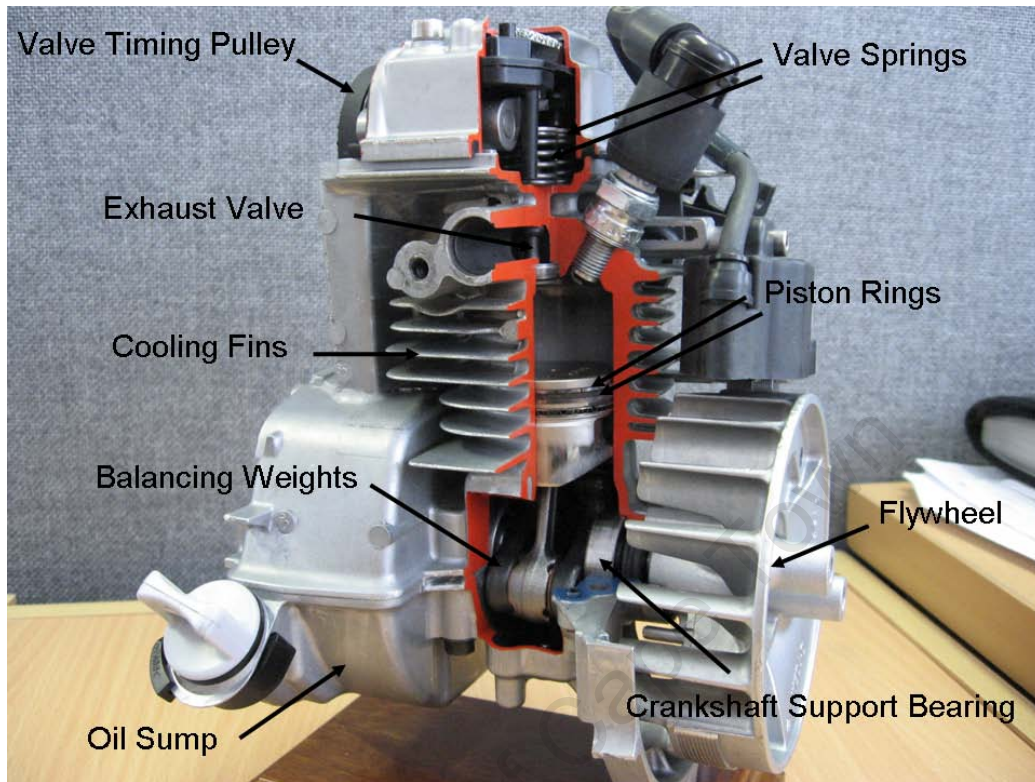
Engine Cutout Showing - Valves, Oil Sump, Piston Rings and Crankshaft Assembly
